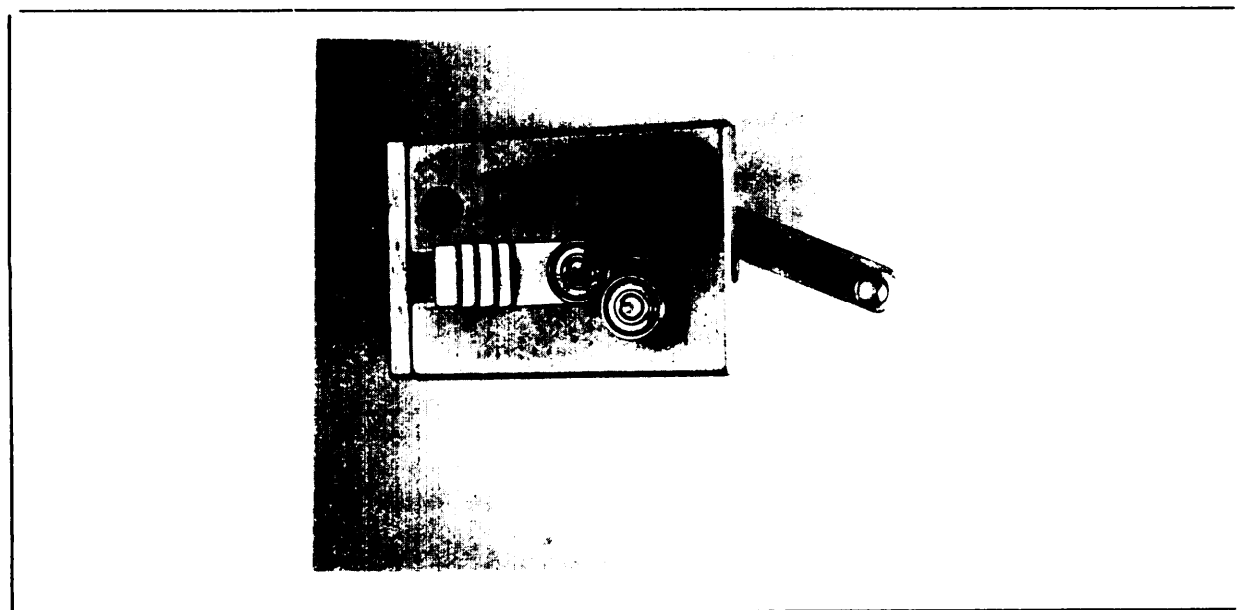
Second view of opener. This tool is also utilized for opening quartz crystals, transistors, and other devices packaged in TO-5 enclosures.
